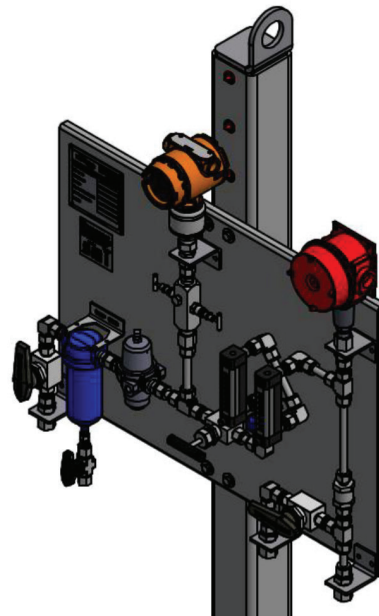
X7x Gas Panel with Mounting Holes mounted to Stand.
